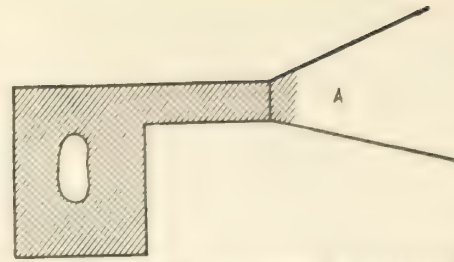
DIE CASTING CONTAINING SHRINKAGE HOLE.
